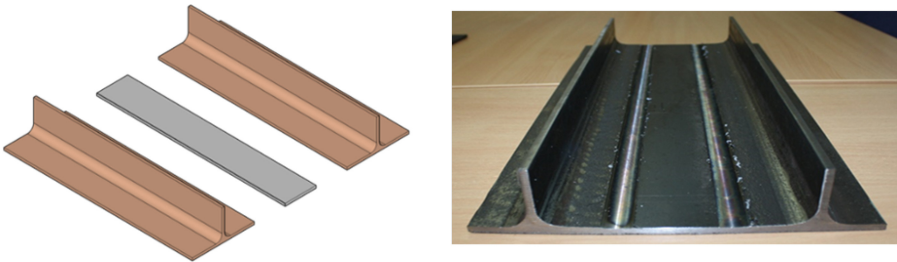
Integrally Stiffened Plate demonstration fabricated by friction stir butt welding two rolled T sections to a steel plate. Source: Authors.
